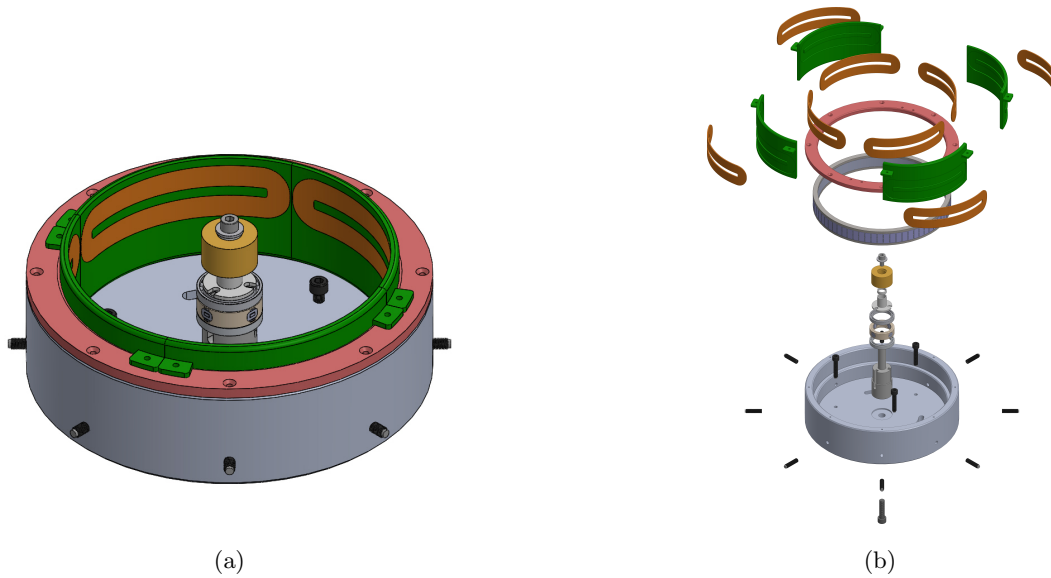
Stator assembly: (a) Assembled, (b) Splitted.
